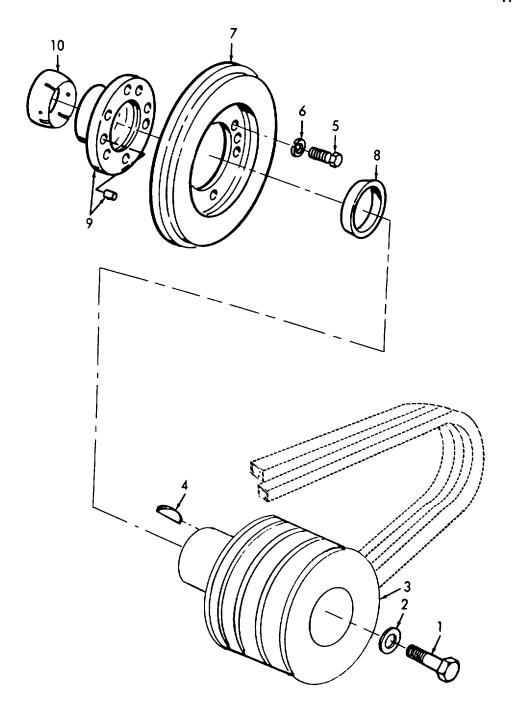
Crankshaft Pulley and Damper, Removal/Installation.
